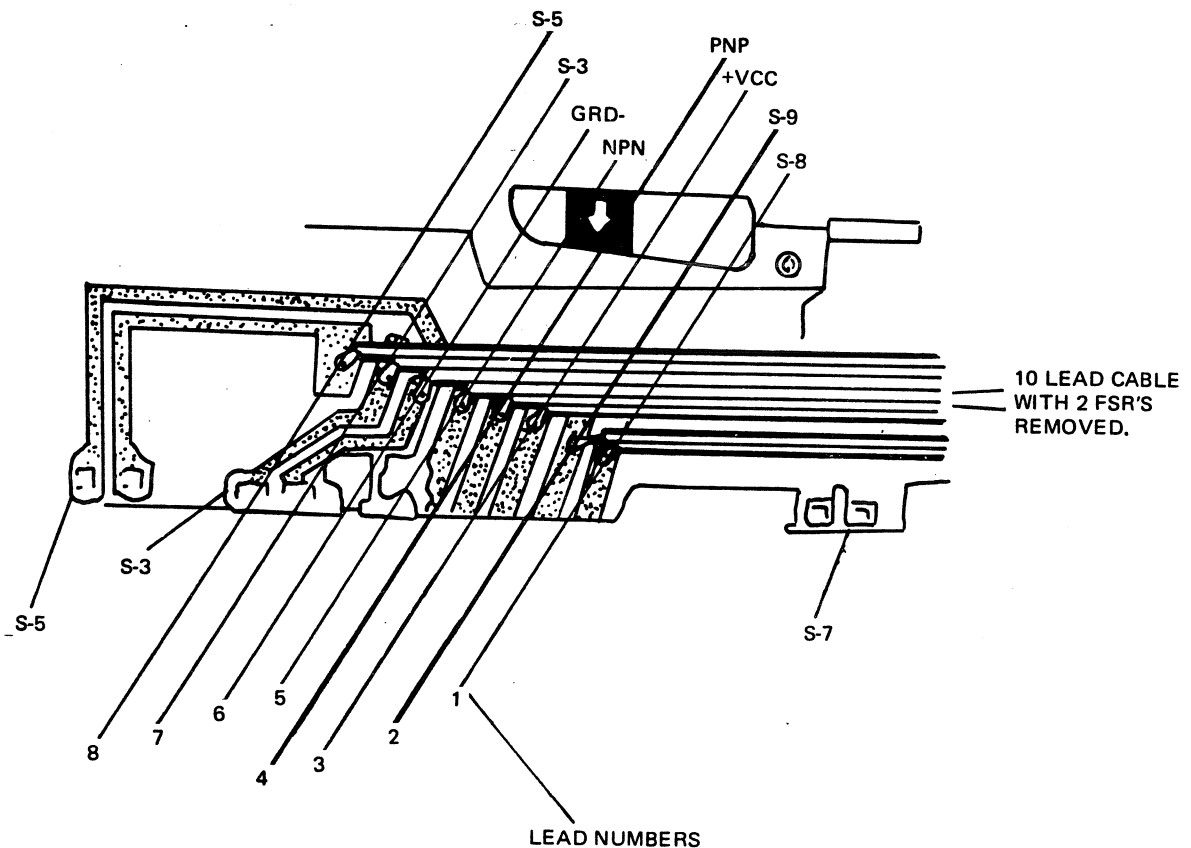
CONNECTING 10 WIRE SHUTTER CABLE TO 8 PAD FLEX CIRCUIT
